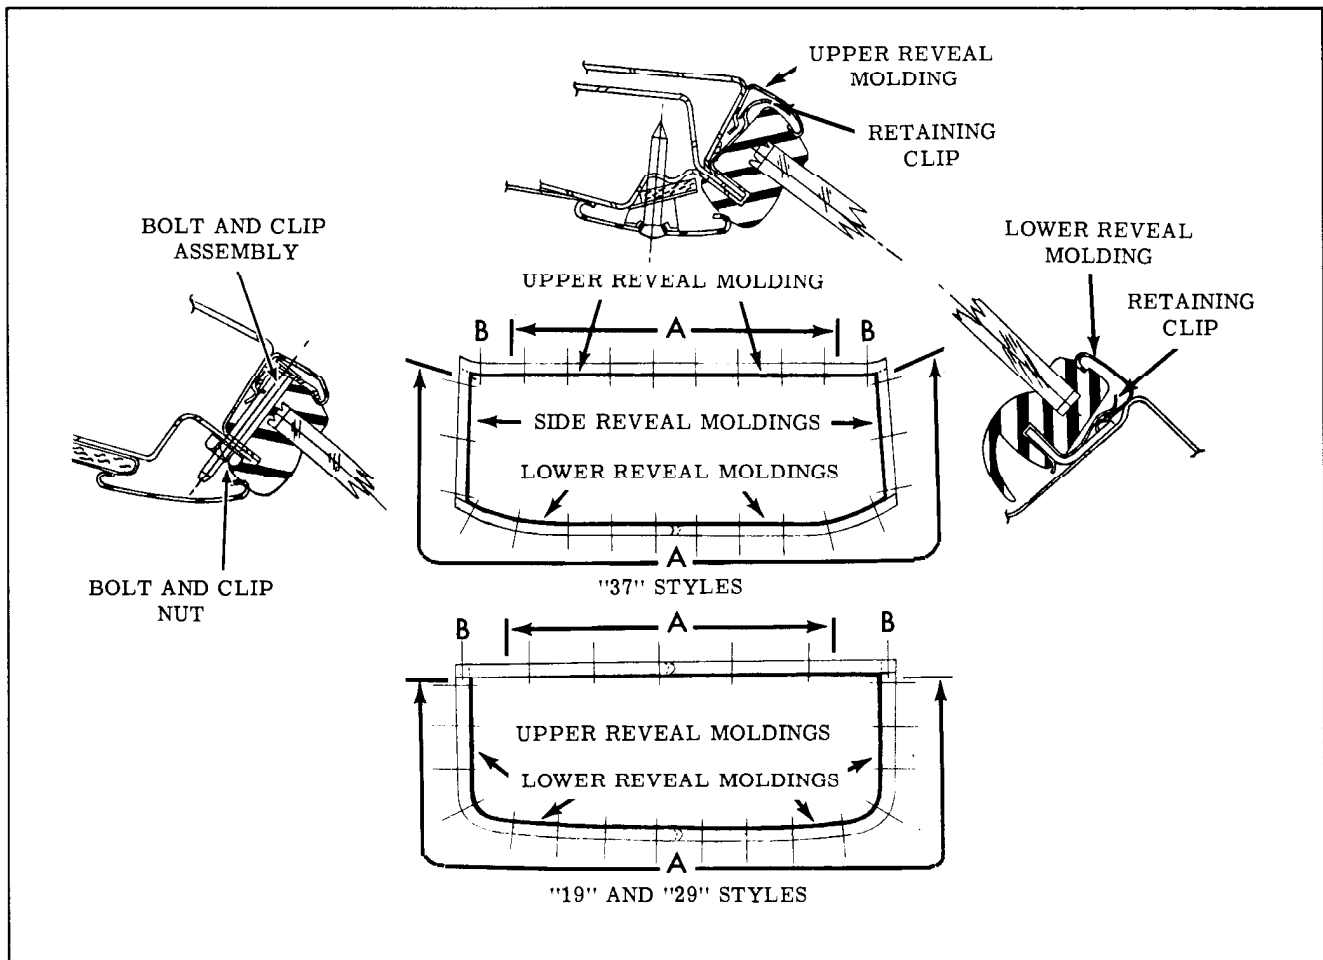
Back Window Reveal Molding (3837 Style)
